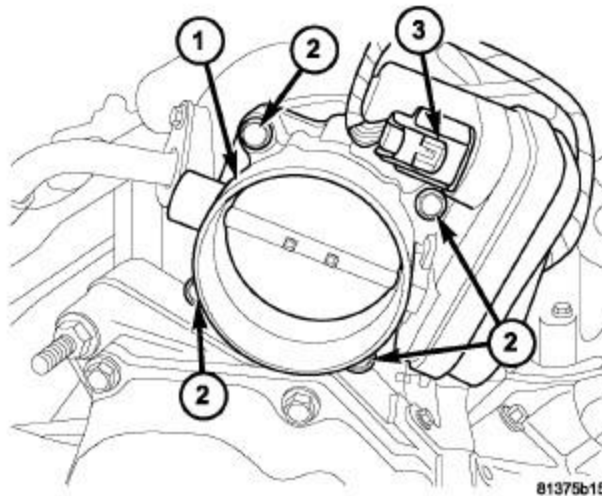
Throttle Body, Throttle Body Mounting Bolts & Electrical Connector
